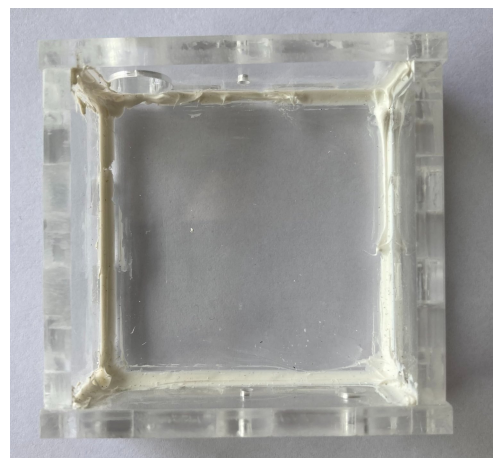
Manufactured gas exchanger box of PMMA sheets with mounting kit sealing at the inside edges.
